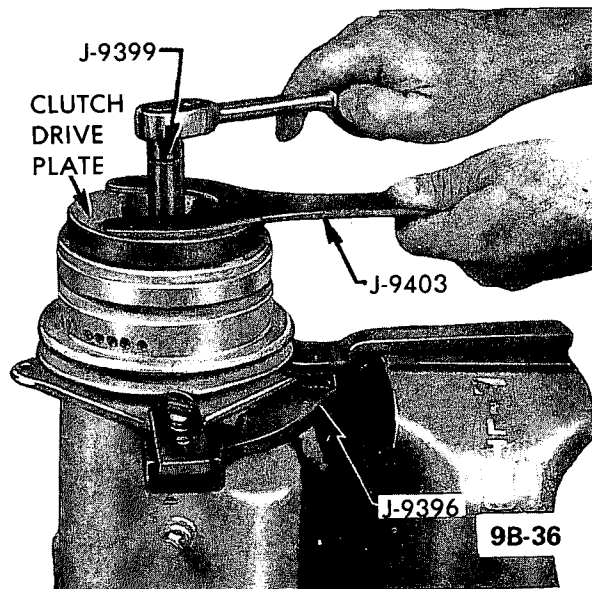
B-58 Removing or Installing Shaft Nut - 6 Cylinder Compressor
